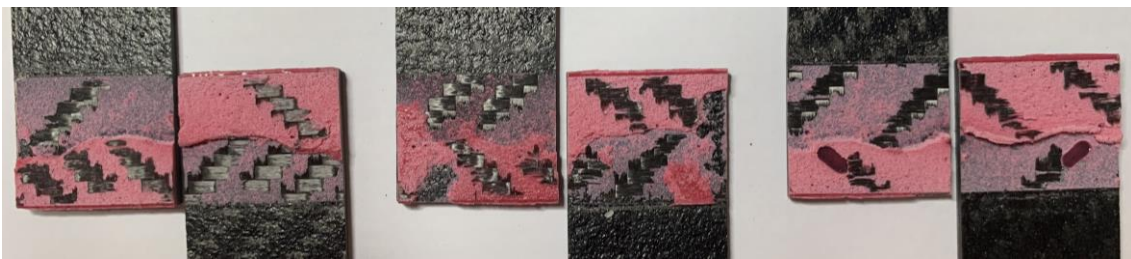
Fracture surface O20_T0.8 (A – B – C)
